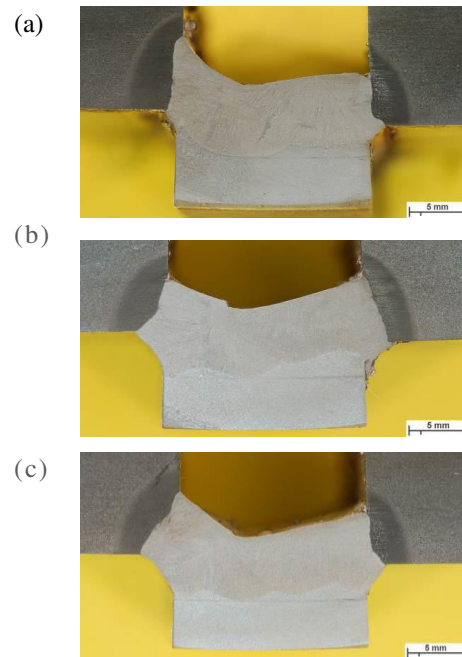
Root geometry after parameter optimization at (a)... 1/4 (b)... 1/2 (c)... 3/4 of weld.
